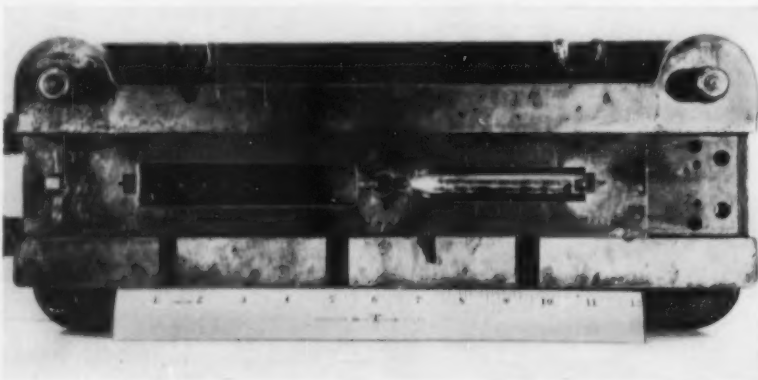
Die used to mold test pieces of polystyrene (see sketches of moldings, p. 146)
